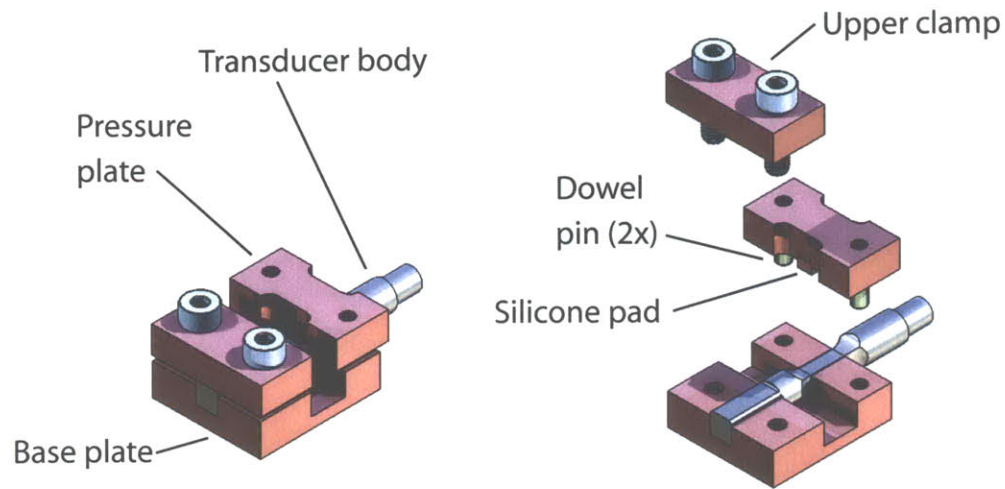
Assembled (*left*) and exploded (*right*) views of the strain gage bonding fixture assembly.
